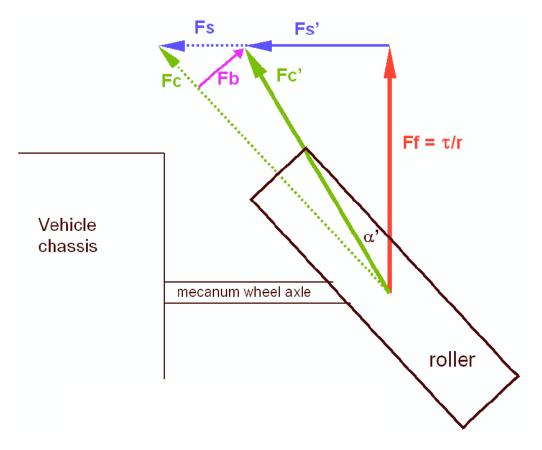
The acting forces on the mecanum wheel with friction in the roller bearings [10].
